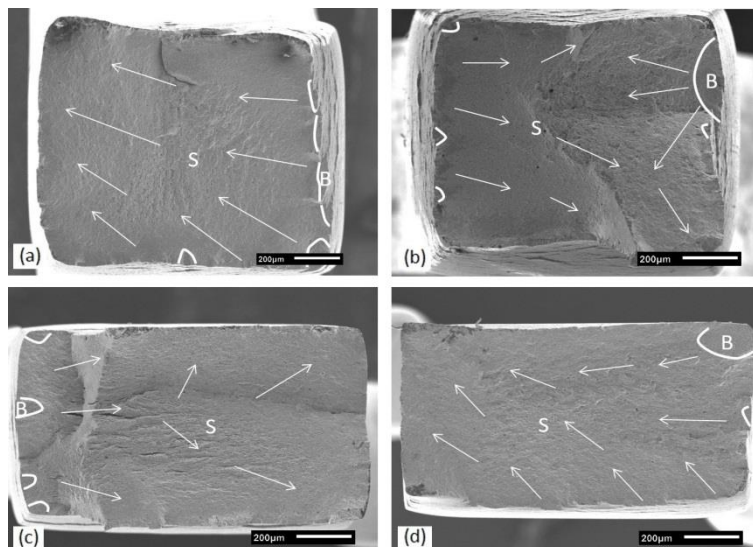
Fracture appearance of (a) 980DP-1.1-30, (b) 1200DP-1.1-30, (c) 980DP-650YS-1.1-30 and (d) 980DP-700YS-1.1-30.
